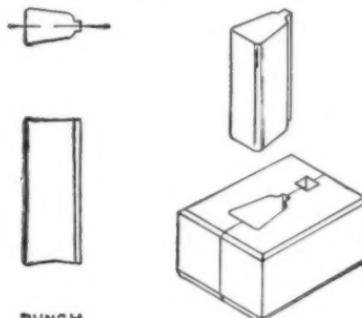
These Carboloy stator laminating dies are made in two halves, clamped together so they can easily be taken apart for regrinding. The punch tapers towards center, providing freer cutting action and prolonging punch life. This type of carbide die set lasts about 50 times longer than similar steel sets used for identical operation.
